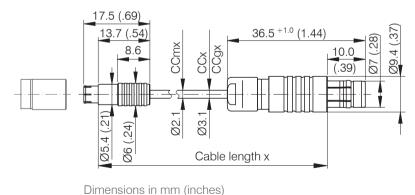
Dimensional drawings sensor cables CCxC, CCmxC, CCgxC
